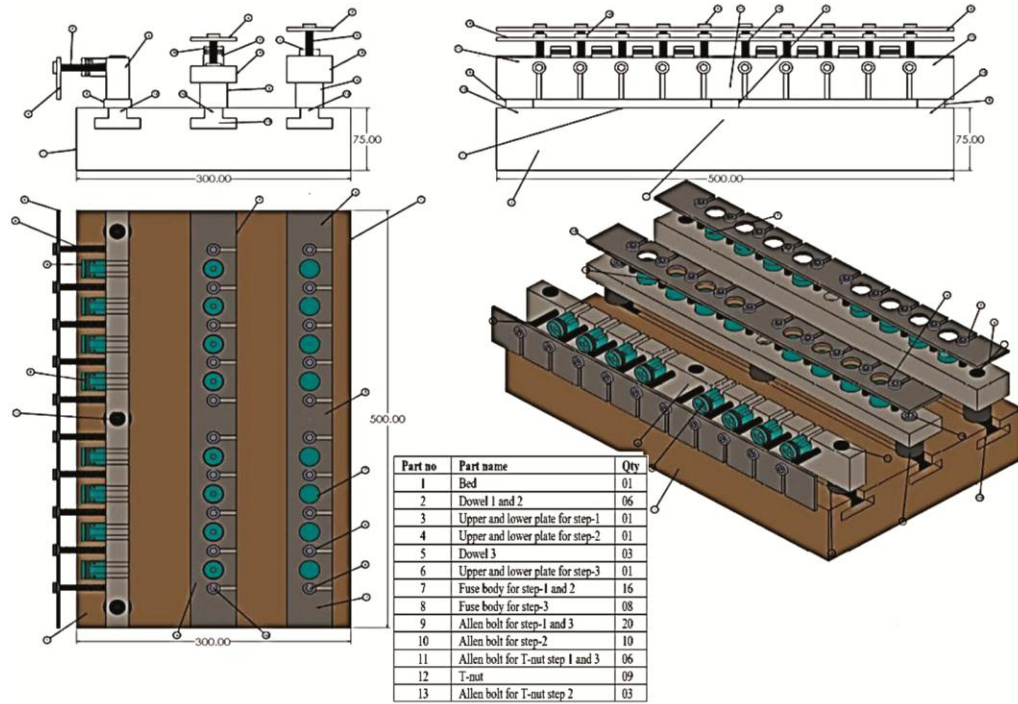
2D and 3D views of Type-B fixture (Patent publication No.202321037535)
